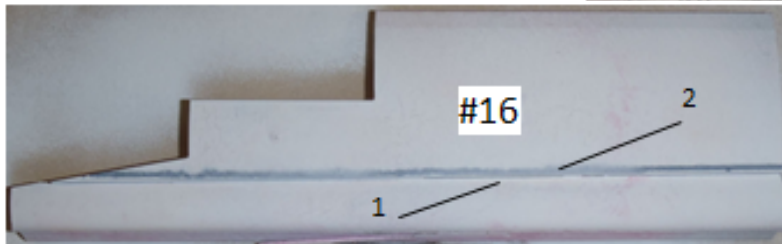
CSX Rail sample #16. Water jet cut perpendicular to surface cracks, dry (red) magnetic particle enhancement.
